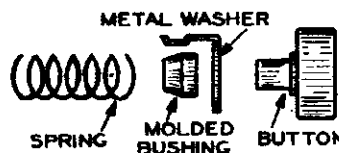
Putting a Hair Spring on a Push Button Shaft
